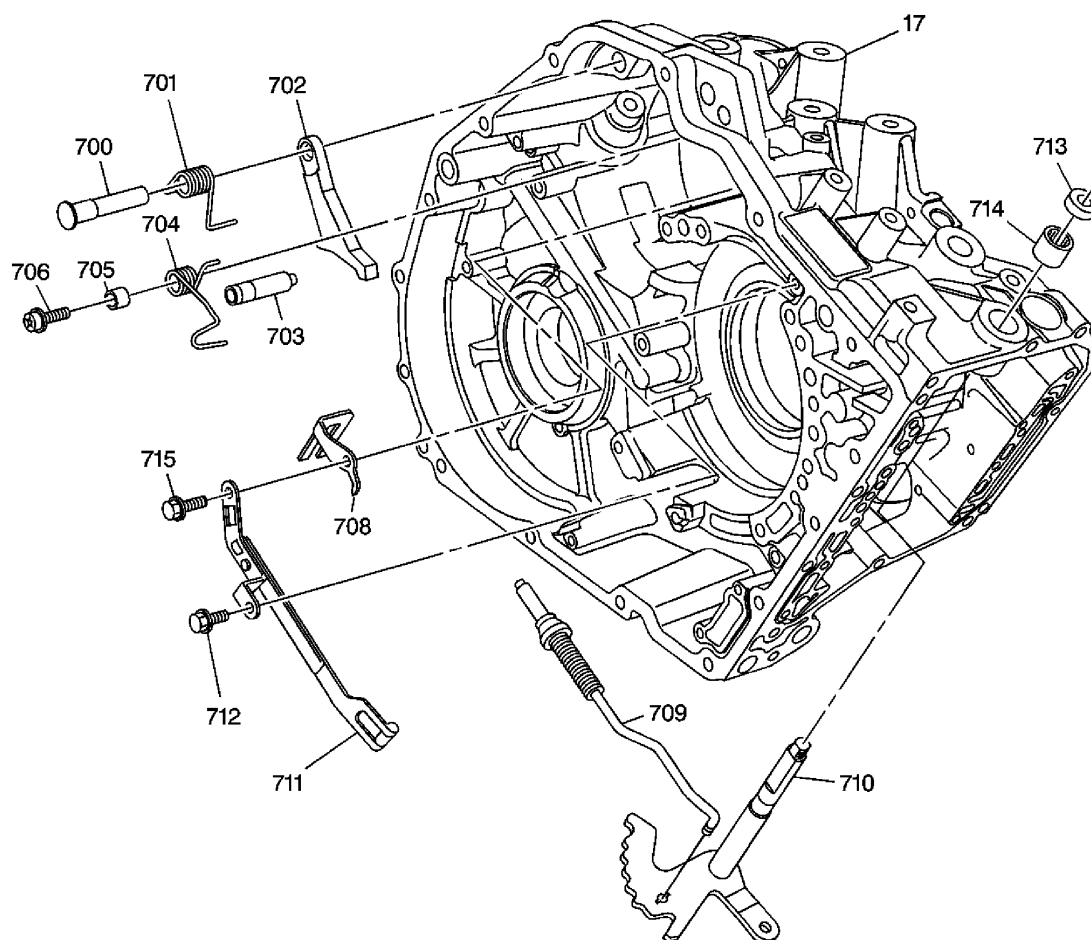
Identifying Range Selector Cable Components (Trans End)
